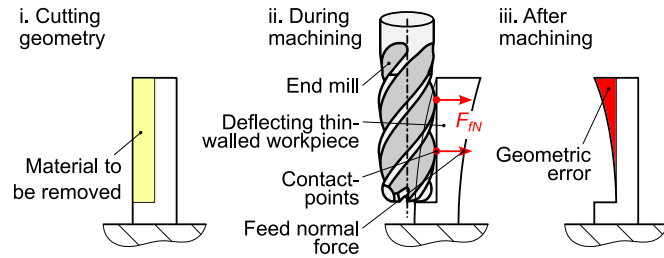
Geometric error formation due to deflection of thin-walled workpieces, shown in cross-section.
